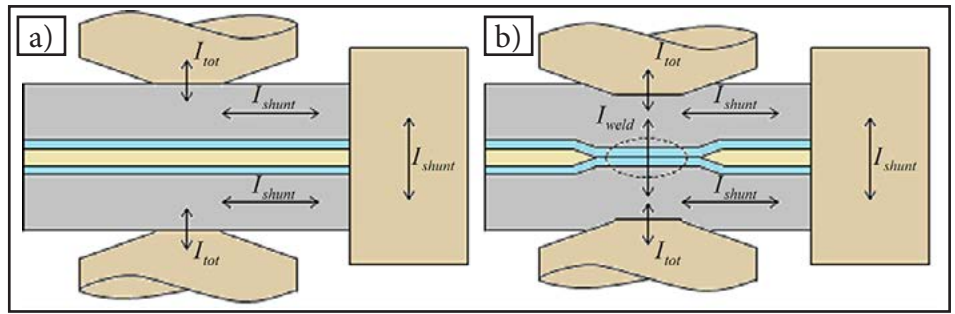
Illustration of current flow (a) during initial heating and squeezing of the polymer to achieve metal-metal contact, and (b) during the actual welding stage.
